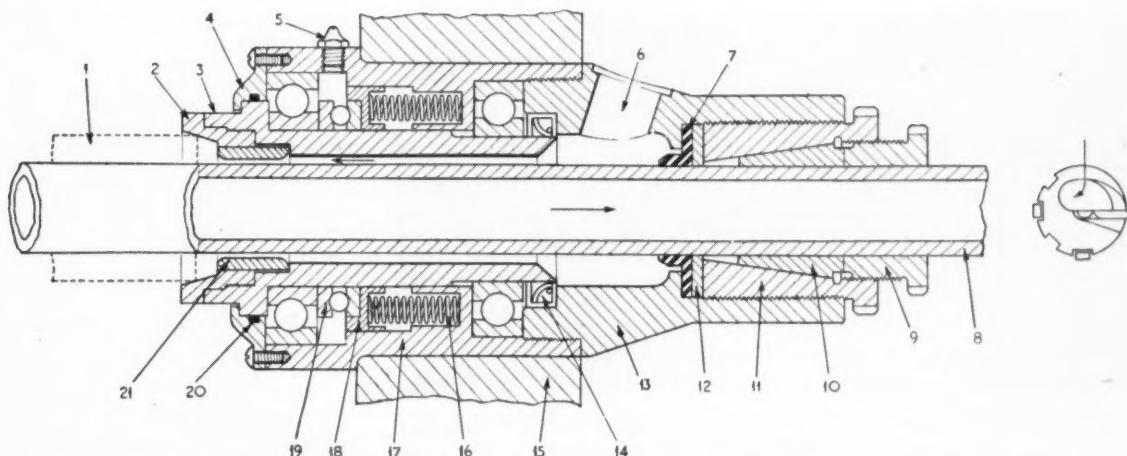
Section through a Wagner pressure head. The oil-seal adapter is fitted to the outside diameter of the workpiece and held by through-bolts to the pressure-head component
